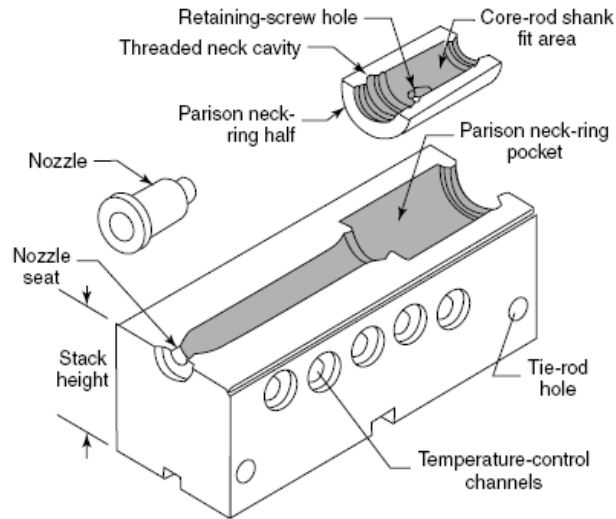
Exploded view of one-half of a parison-mold cavity, with nozzle and neck-ring details.
